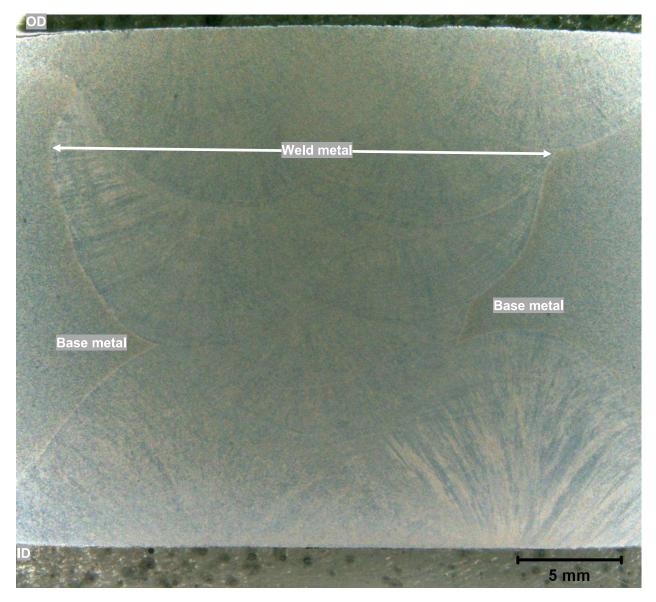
Light photomicrograph of Mount M3 showing the morphology of the weld (2% Nital Etchant); area indicated in Figure 18. There appears to be 6 weld passes made from the OD surface and 2 from the ID surface with the ID passes being deposited first. No pre-existing flaws are visible.
